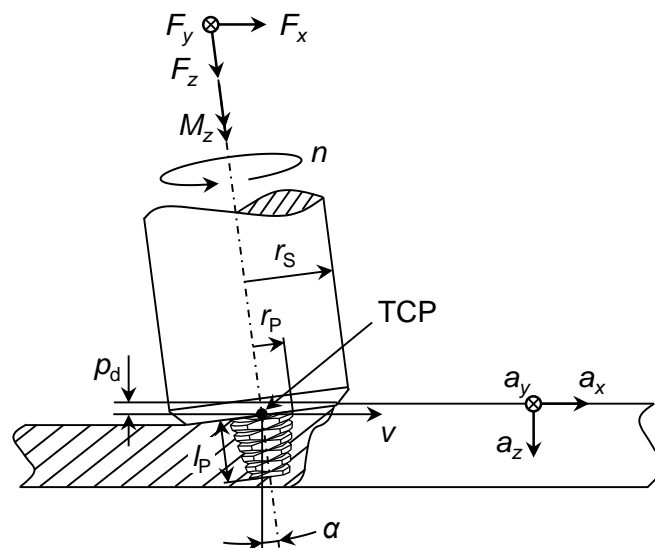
Principle sketch of the welding tool and the FSW process in a longitudinal section through the weld seam (based on RUHSTORFER 2012, p. 8)
